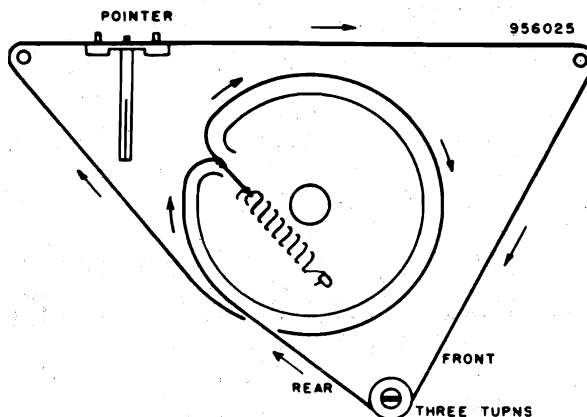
DIAL CORD STRINGING FOR CHASSIS 120125-B
